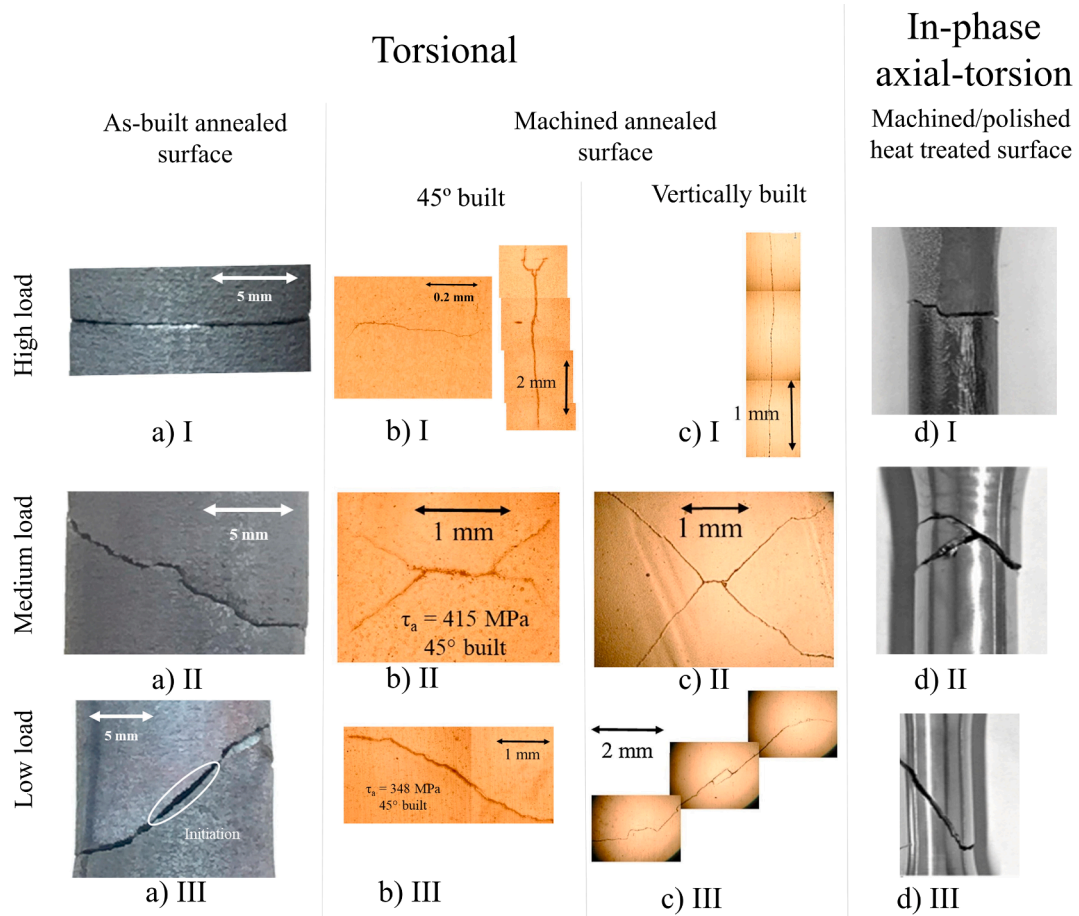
Examples of crack orientations with changing load on AM Ti6Al4V specimens under torsional loading in a) as-built annealed, b) 45° built machined annealed surface, and c) vertically built machined annealed surface; d) in-phase axial-torsion loading in machined/polished heat-treated surface. Figure adapted from [169,198,208].
